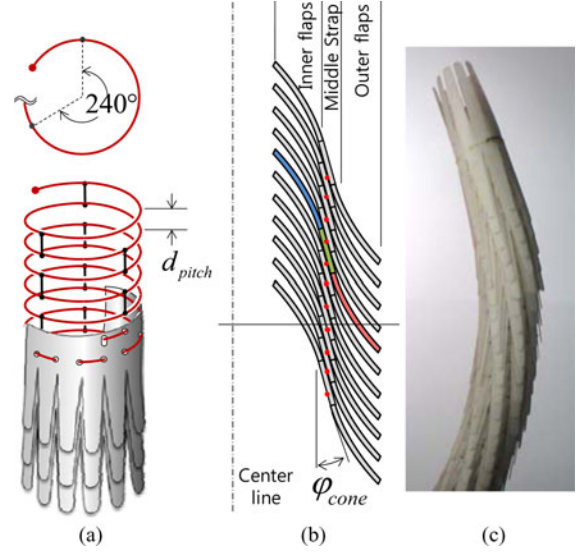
(a) Assembled one-side flap pattern. (b) Section view of double side flap pattern. (c) Assembled double-side flap pattern.
